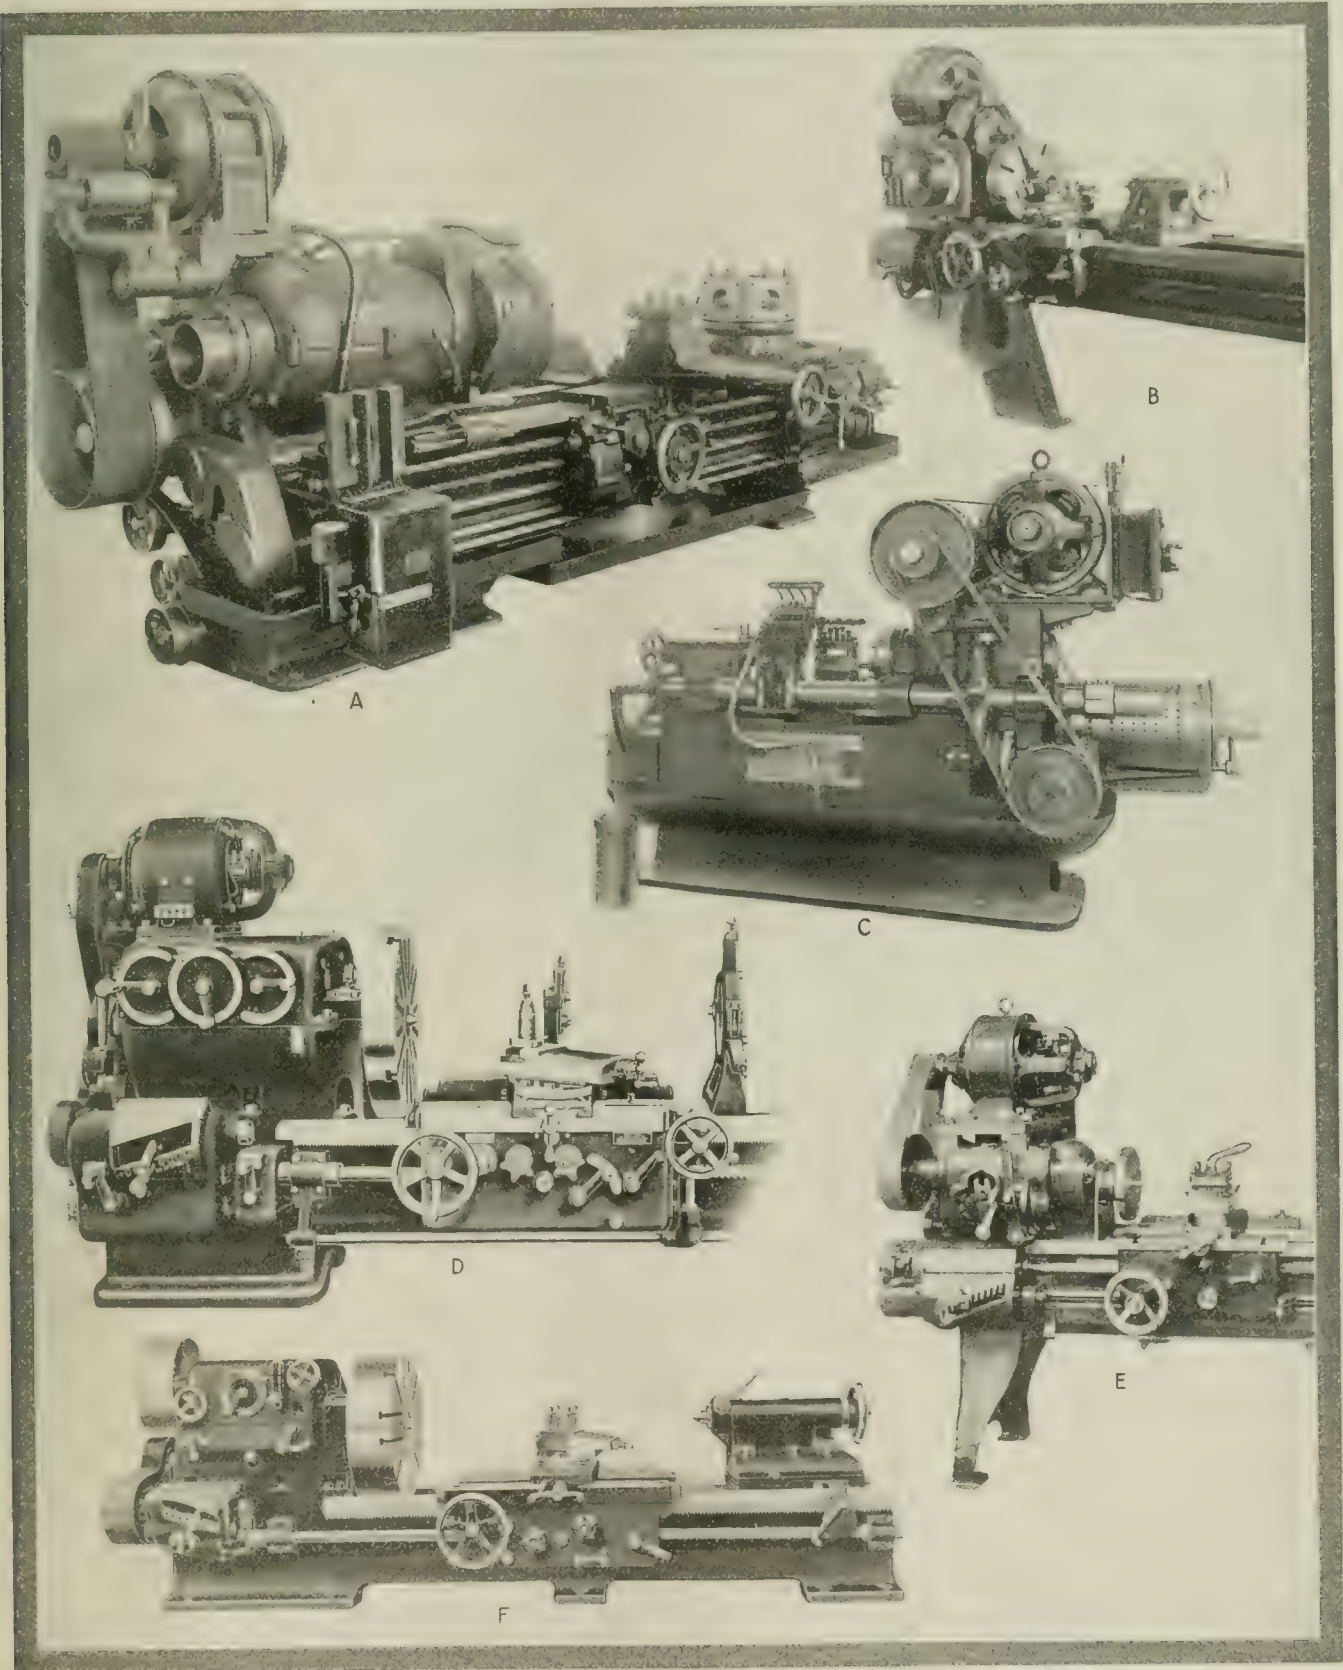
DIFFERENT METHODS OF CONTROLLING LATHE MOTORS
